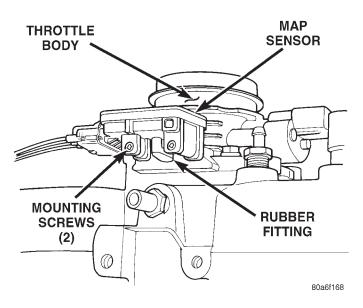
Rubber L-Shaped Fitting—MAPSensor-to-Throttle Body
